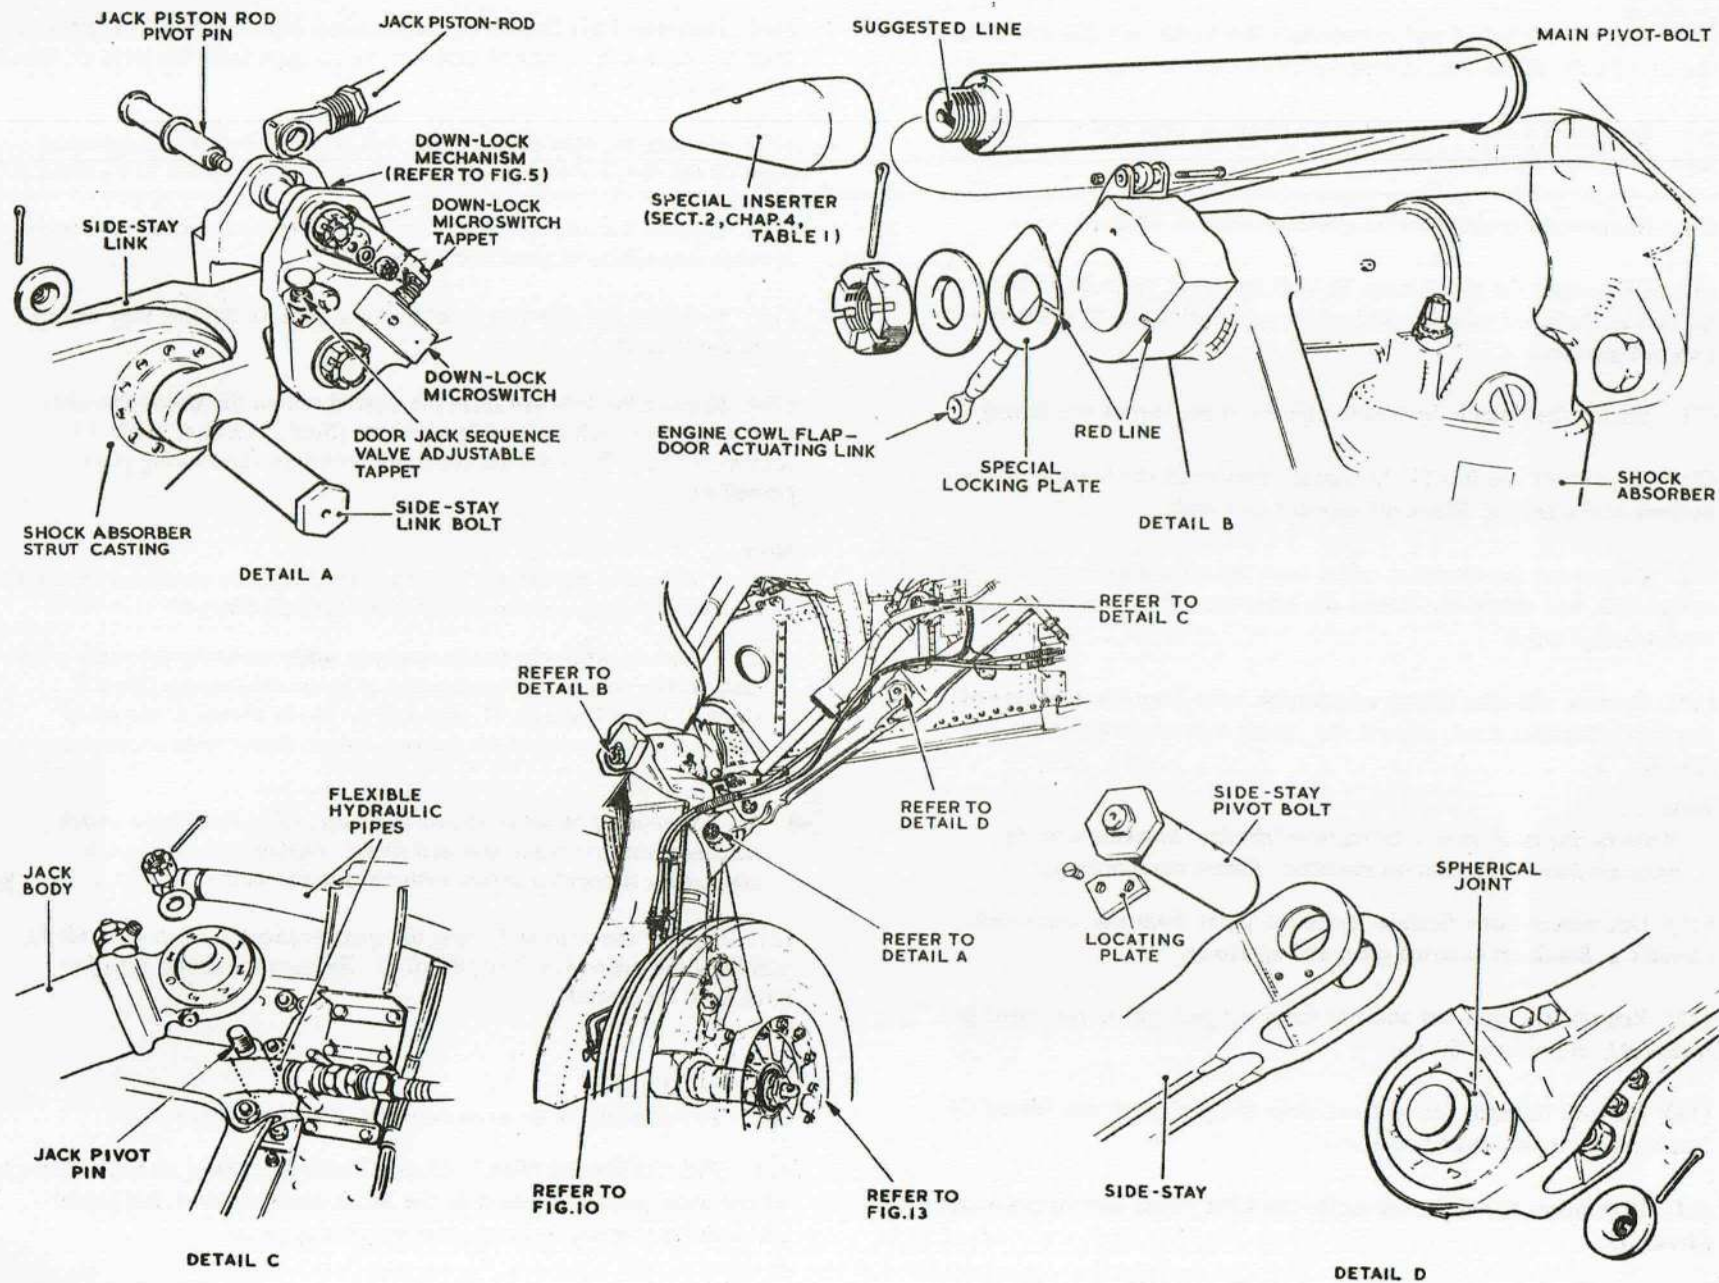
FIG. II. UNDERCARRIAGE-REMOVAL AND ASSEMBLY
